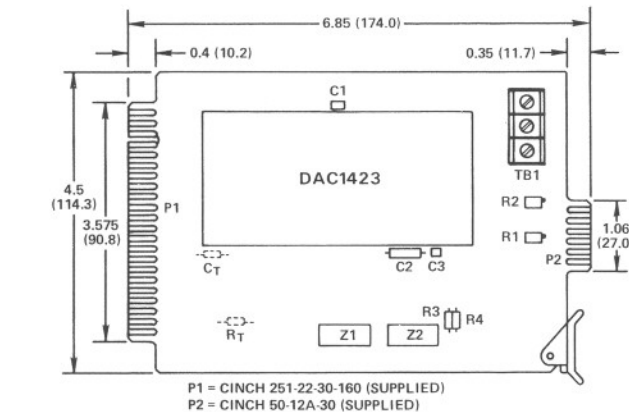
AC1582 Mounting Card. Dimensions shown in inches and (mm).
